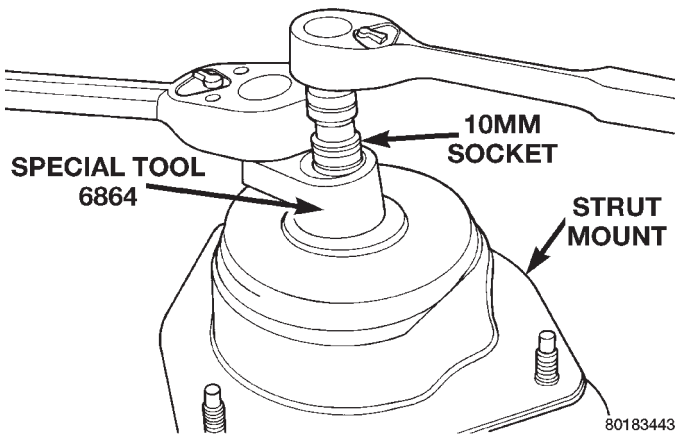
Strut Shaft Retaining Nut Removal Tools
